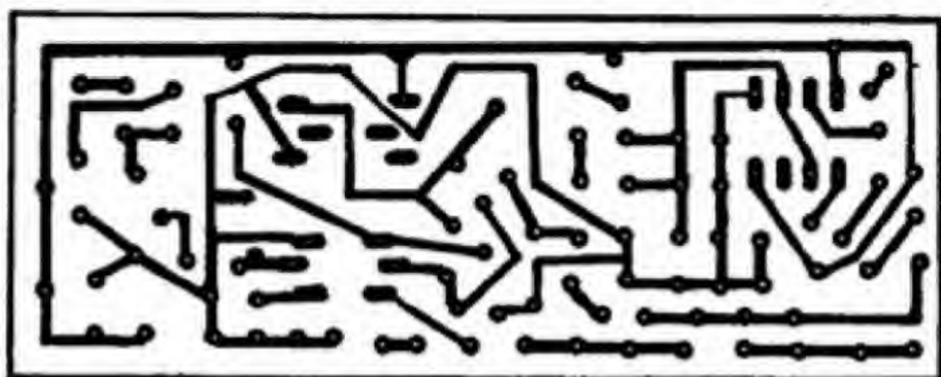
Actual-size PCB layout for the circuit shown in Fig. 2.
